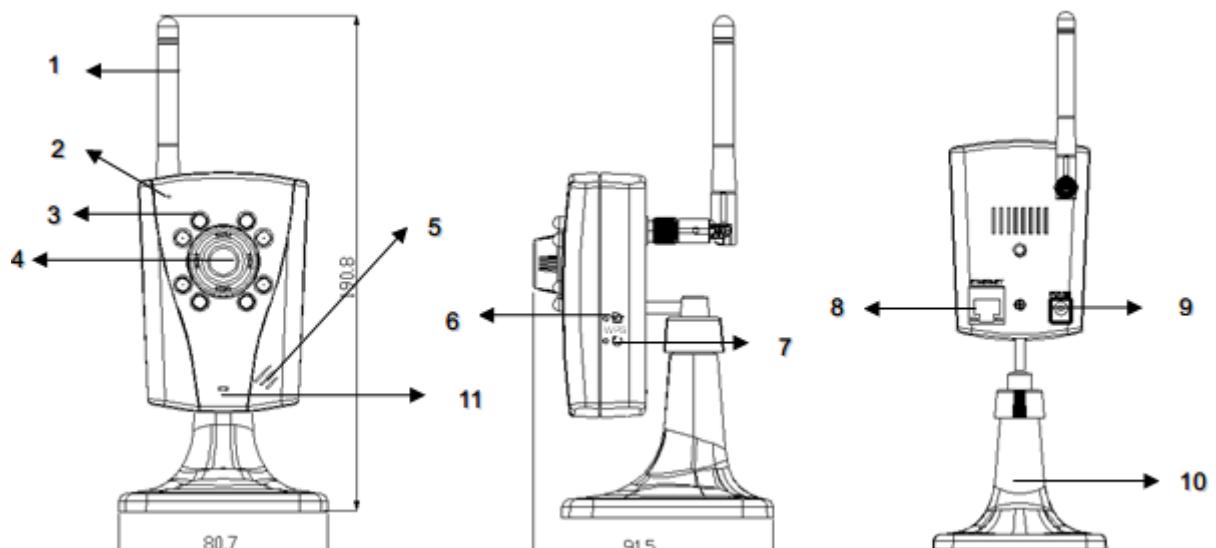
PHYSICAL DIMENSION B & PICTORIAL INDEX
